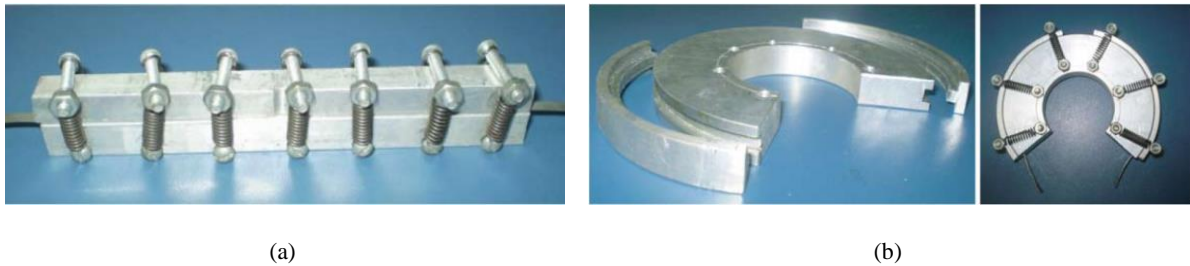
Examples of joining holders. (a) Linear type. (b) Ring type. From [53].
